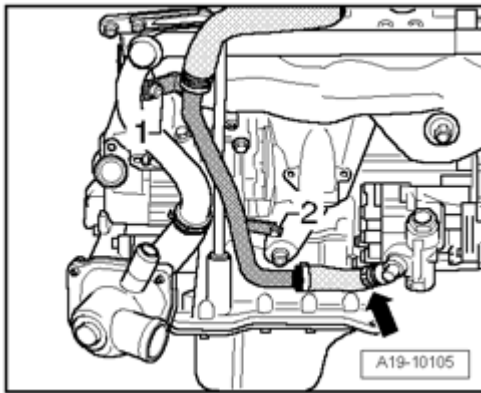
Removing Bolts & Return Pipe From Power-Steering Pump
